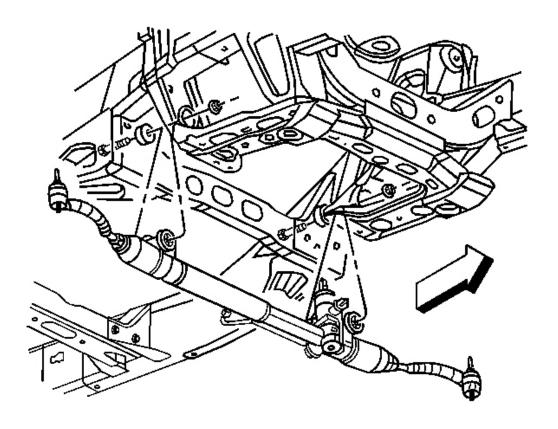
View Of Power Steering Gear & Bolts Courtesy of GENERAL MOTORS CORP.
